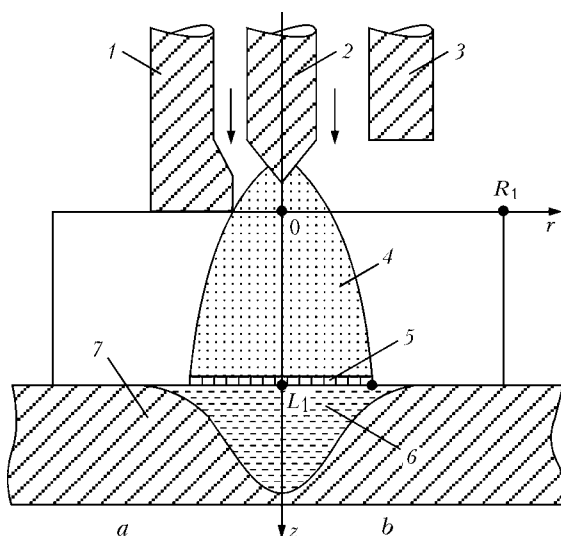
Schematics of plasma (a) and TIG (b) welding: 1 – plasma-shaping nozzle; 2 – refractory electrode (cathode); 3 – shielding gas nozzle; 4 – arc column; 5 – anode region of the arc; 6 – weld pool; 7 – workpiece (anode)
